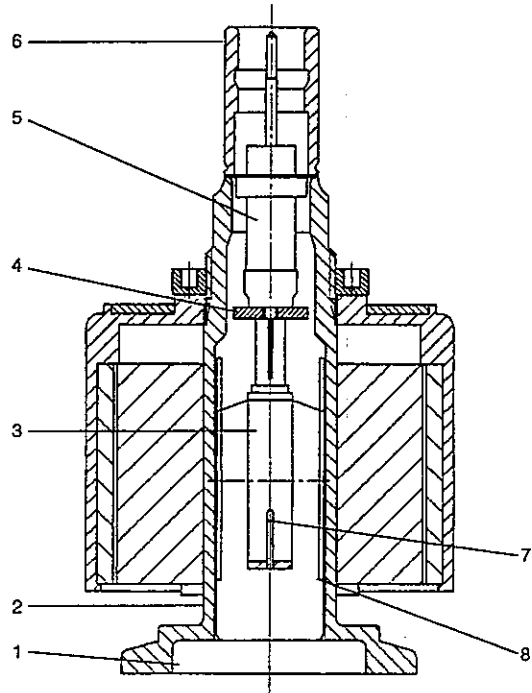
Sectional view of the PENNINGVAC gauge head PR 25
